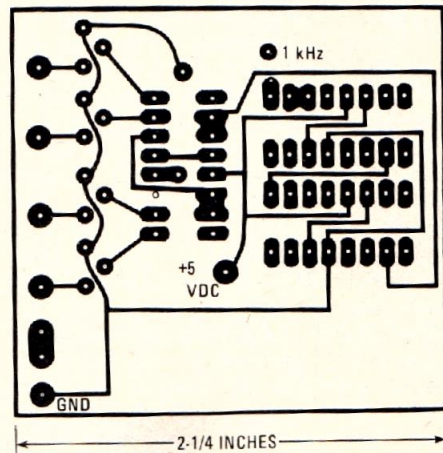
DIVIDER CHAIN AND LATCHES are located on separate PC board.
